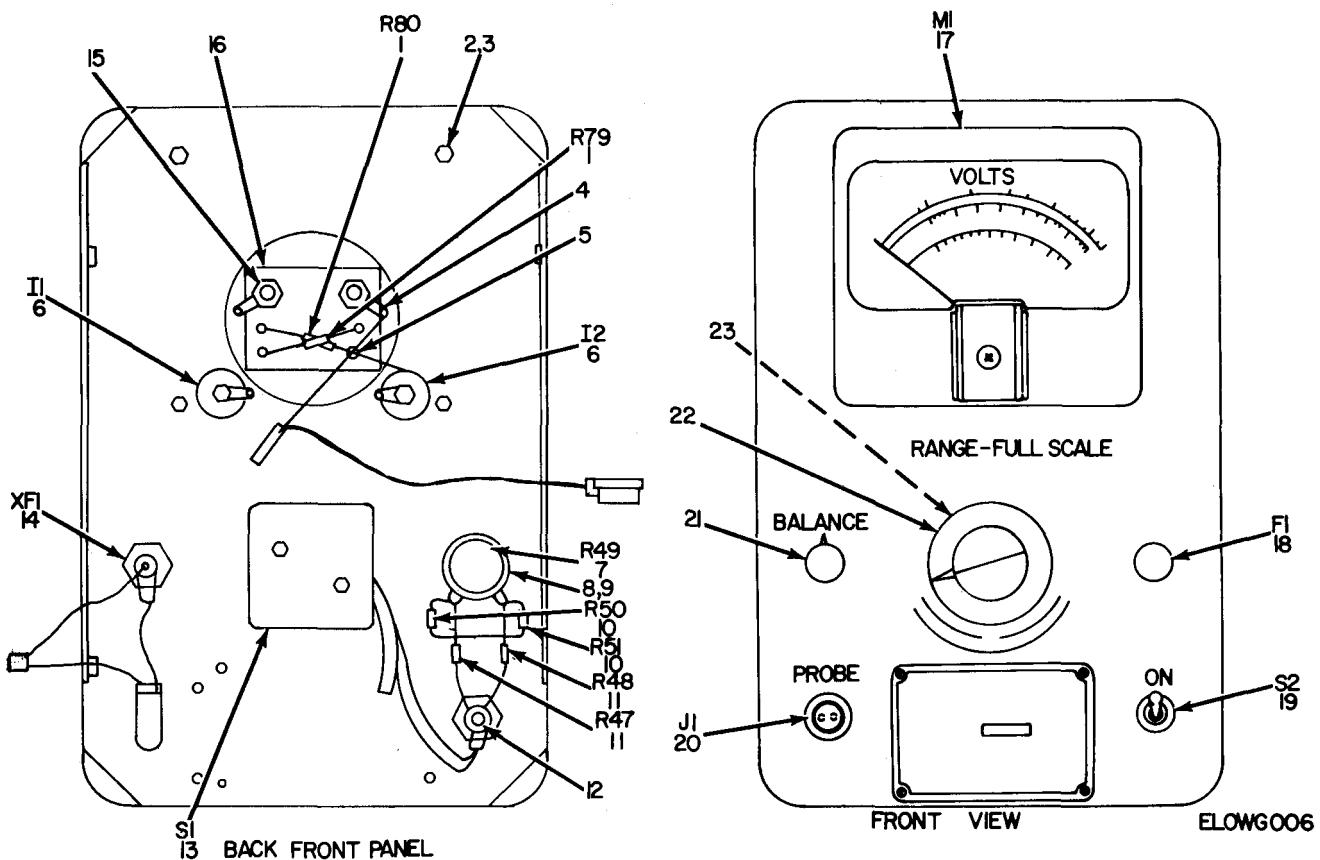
Voltmeter, Electronic ME-247/U or ME-247A/U, Panel Assembly.
